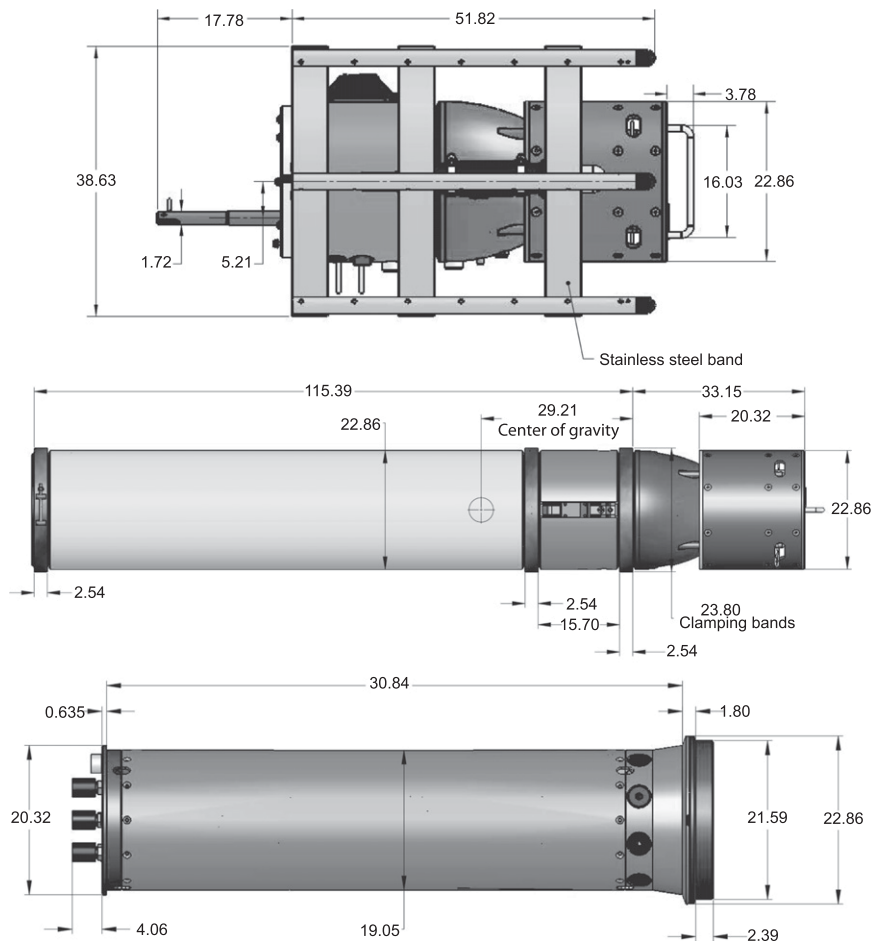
Principal dimensions of ASIP upon disassembly (cm).
